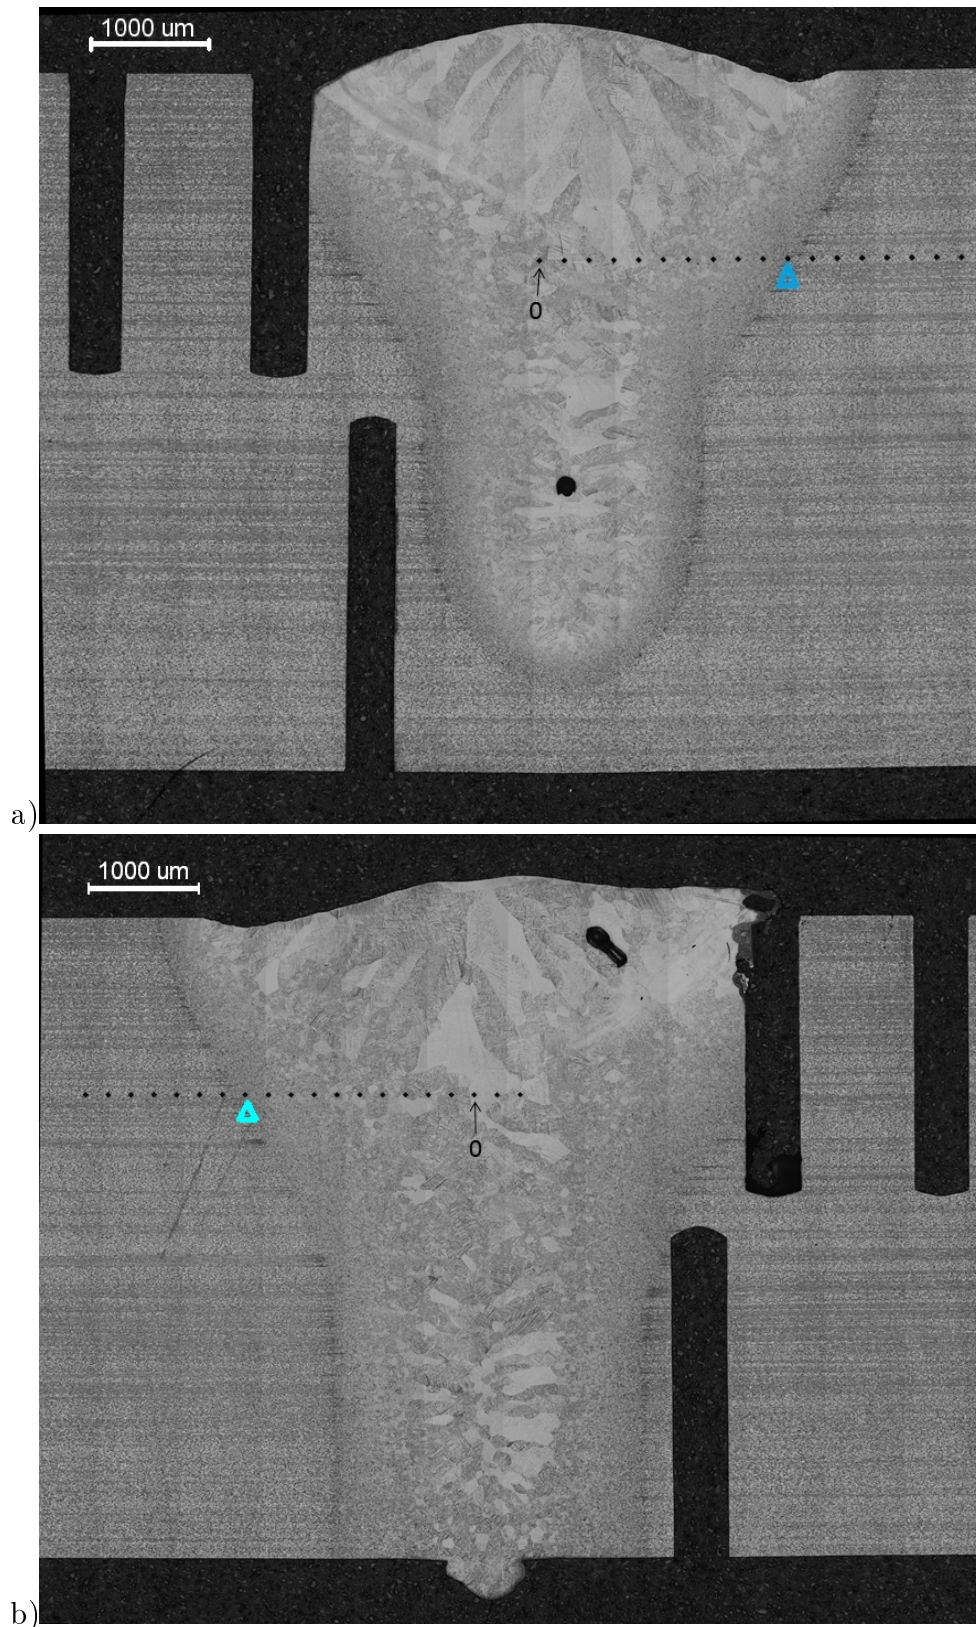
Montages for the Ti-6Al-4V plate 5.8 mm thick tested and the hardness indentations, material with initial equiaxed microstructure. a) weld carried out at 2 m/min 100% power; b) weld carried out at 1.5 m/min at 100% power. The “0” point shows the first hardness measurement referenced in figure 3.54 and corresponds to the weld centreline
